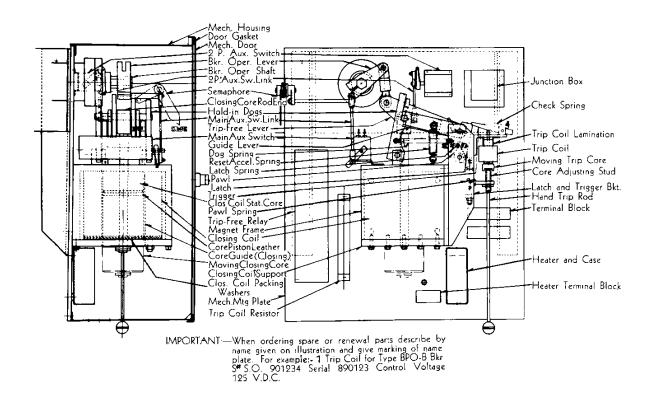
Type H-6 Solenoid Operated Mechanism, on Type BPO-B Breaker -- Sectional View
